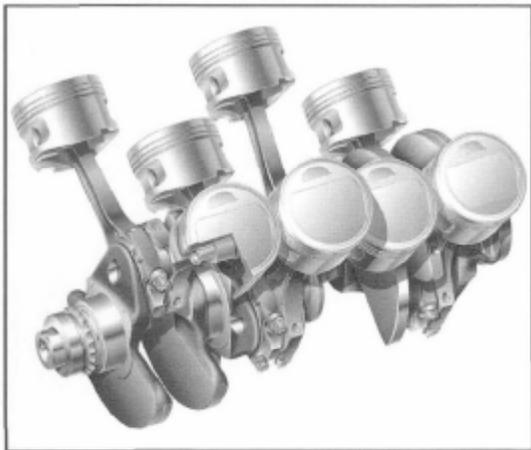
Crank gear of a V-8 passenger car spark-ignition engine.
